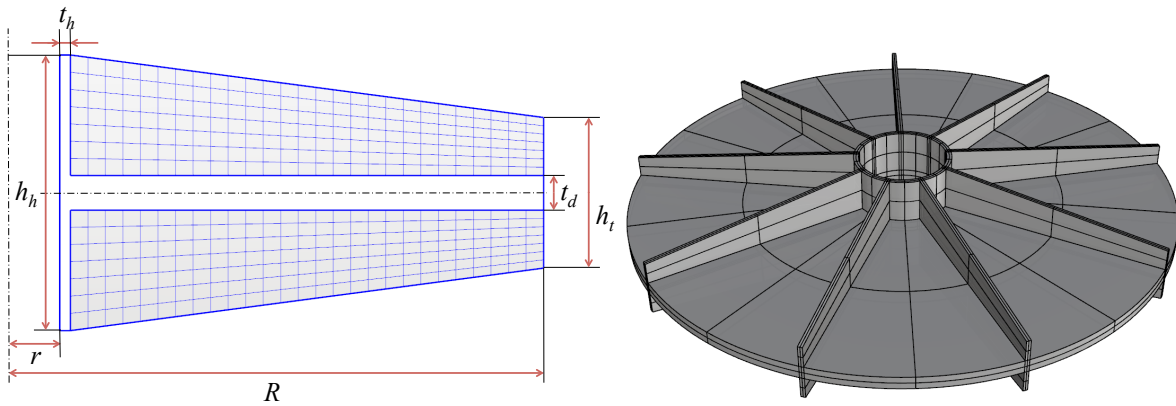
Left: Rotor cross-section with dimensions. Right: Rotor solid model.
